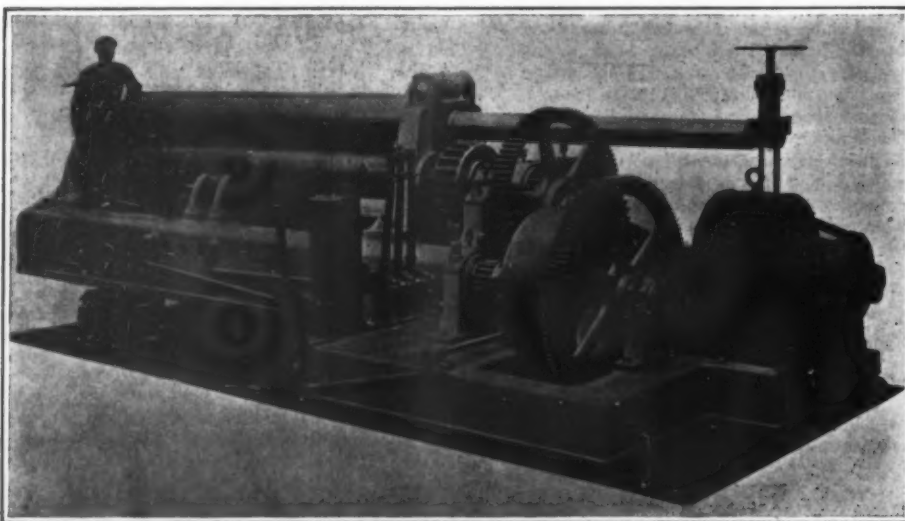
Electric power-driven plate-bending rolls, horizontal type.
